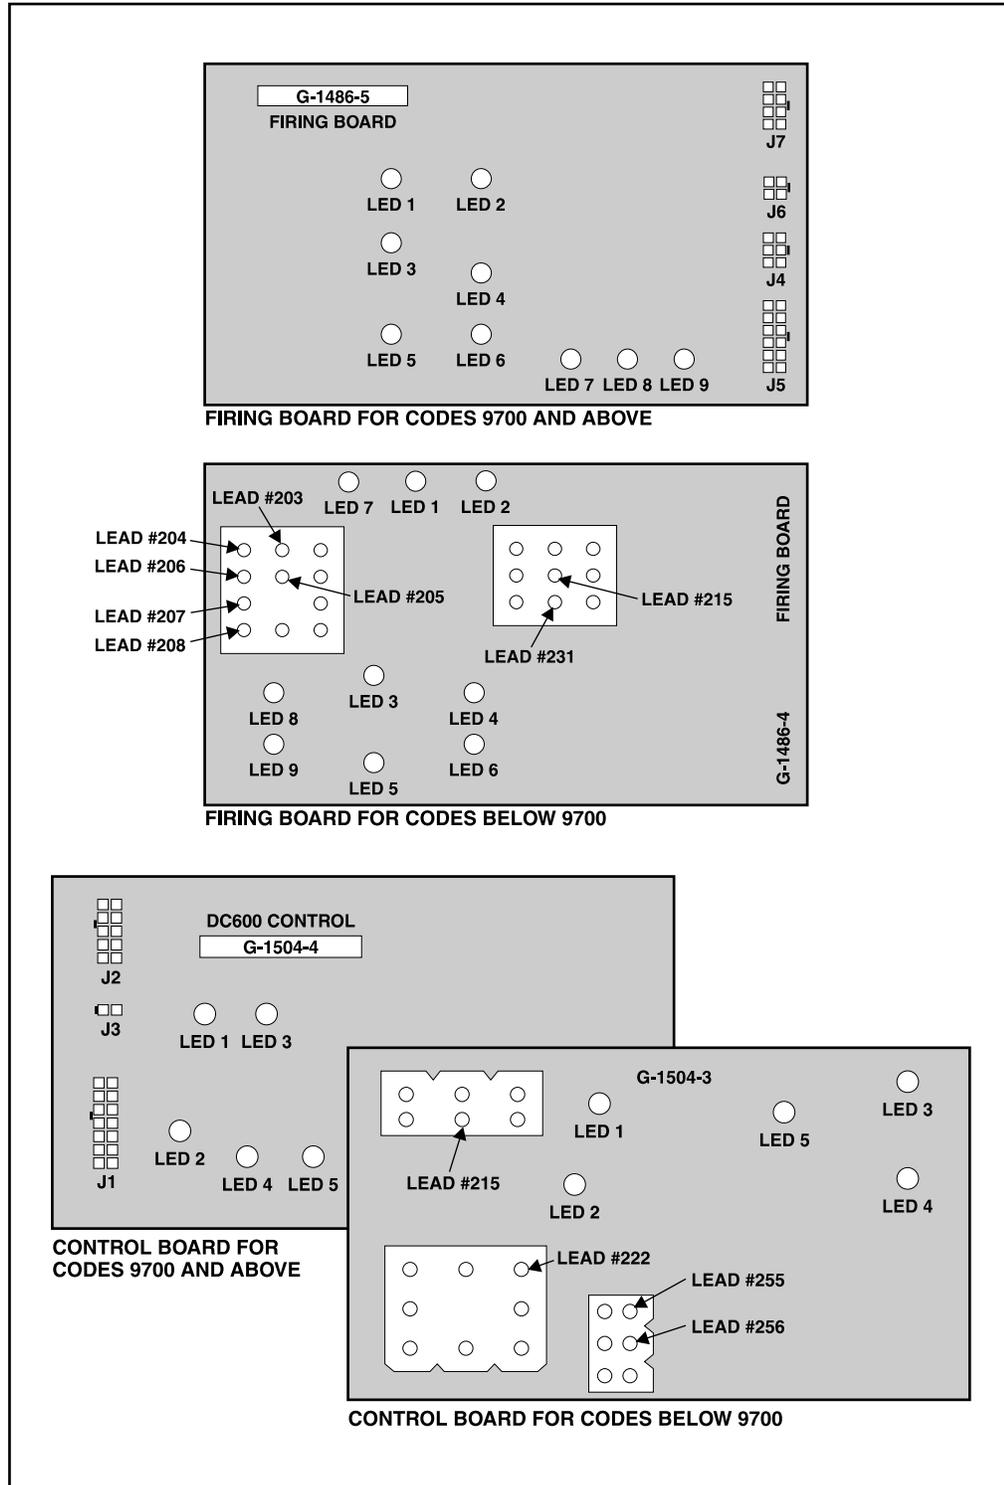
Firing Board and Control Board Molex Plug Locations.
